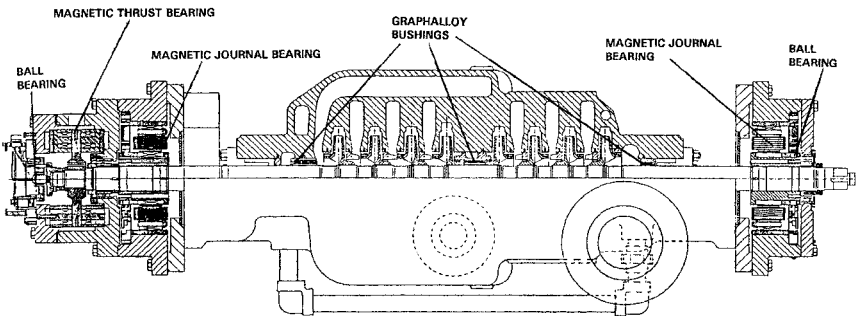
Magnetic bearing configuration in multistage pump⁶
